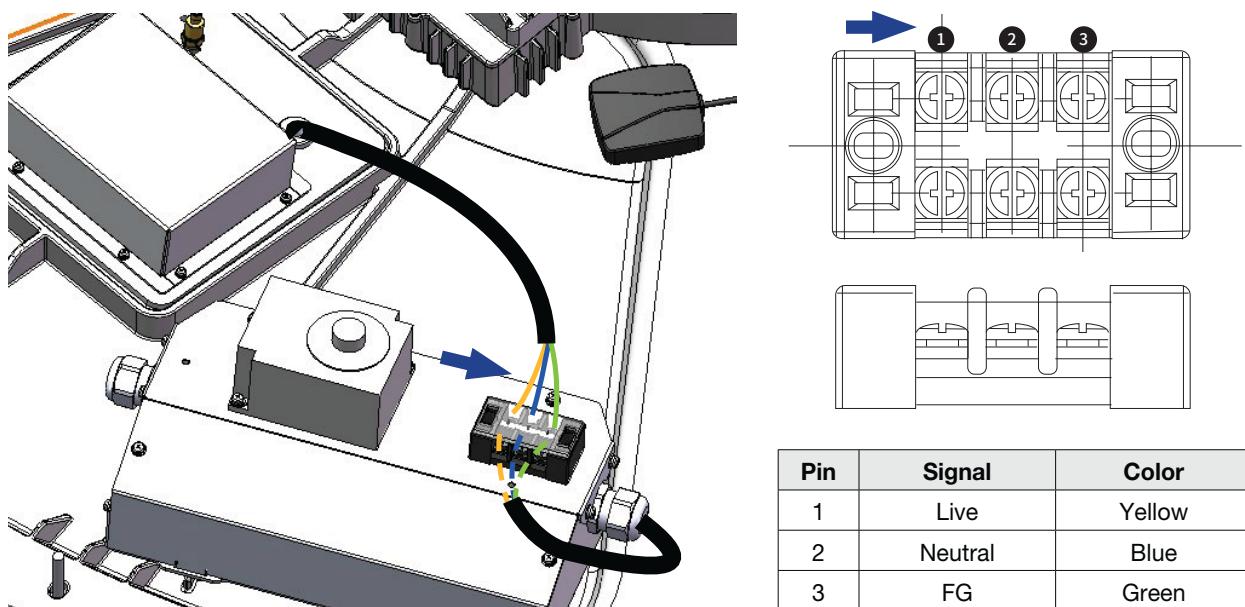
Connecting Power Cable for Heating module to Terminal Block
